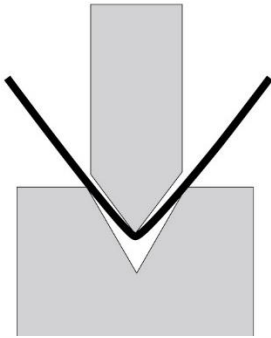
Sheet metal bending process on press brake. (Benson, 2017.)
